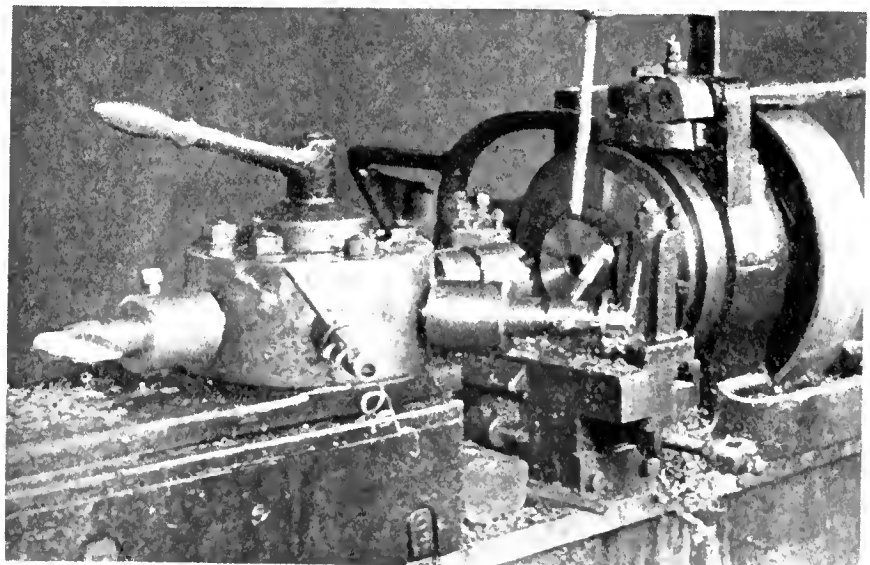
MACHINING HEADED END ON SINGLE PURPOSE LATHE.
